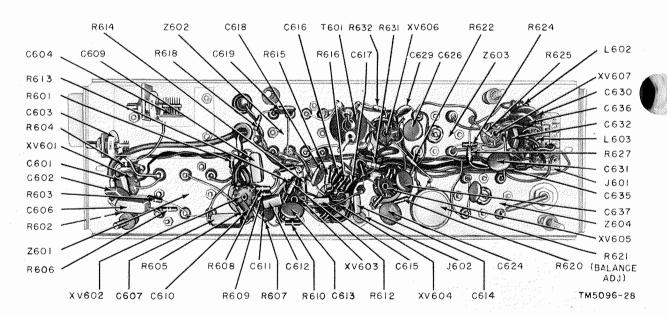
Crystal oscillator balanced-modulator subchassis, location of parts, bottom view.
